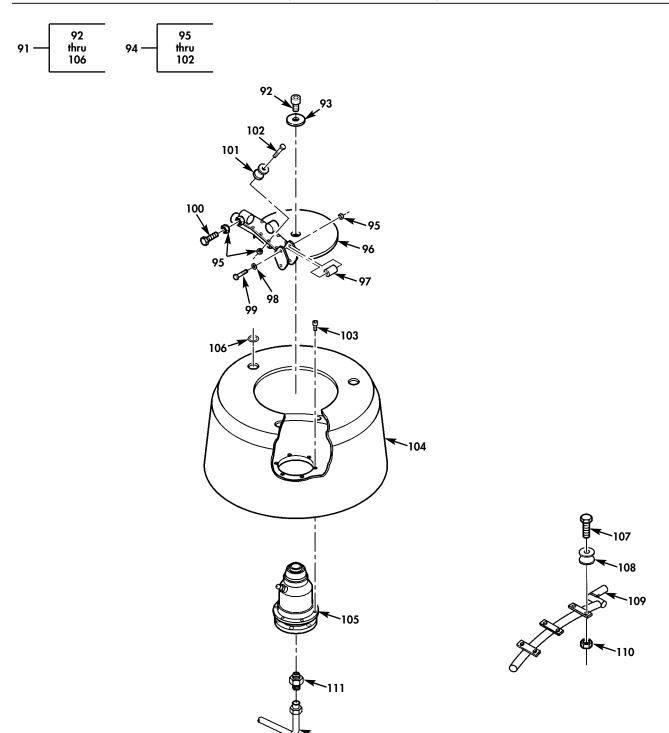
Winch Assembly and Related Parts (Sheet 5 of 5).
